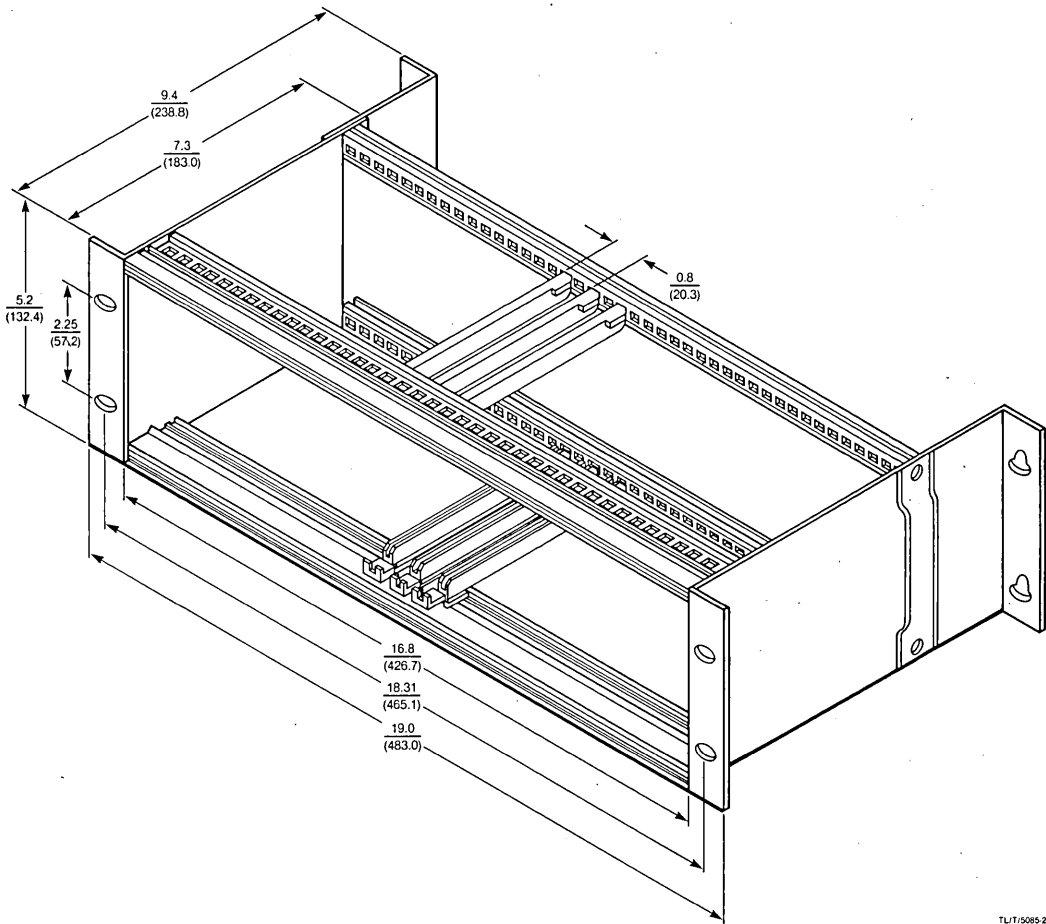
CIM-604 Card Cage Dimensions [inches/(millimeters)]
